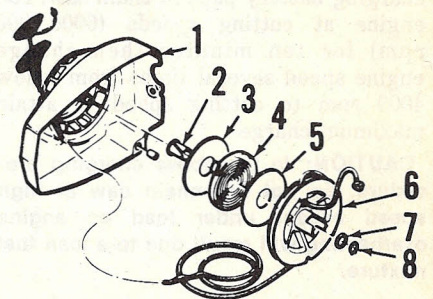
Exploded view of left hand recoil starter used on some export models.
